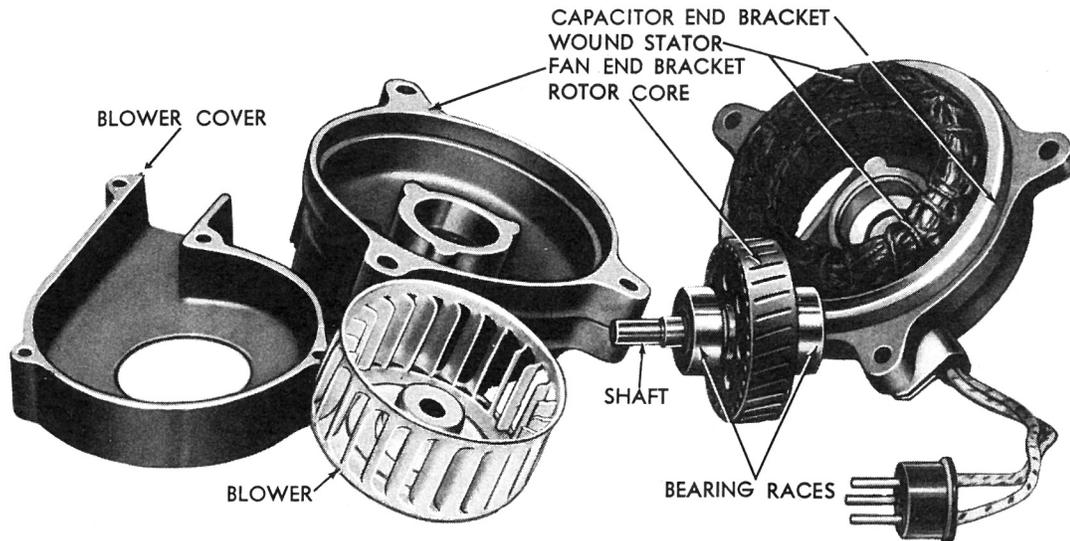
Model BN Radio Equipment 400-Cycle Blower Motor Disassembled View
